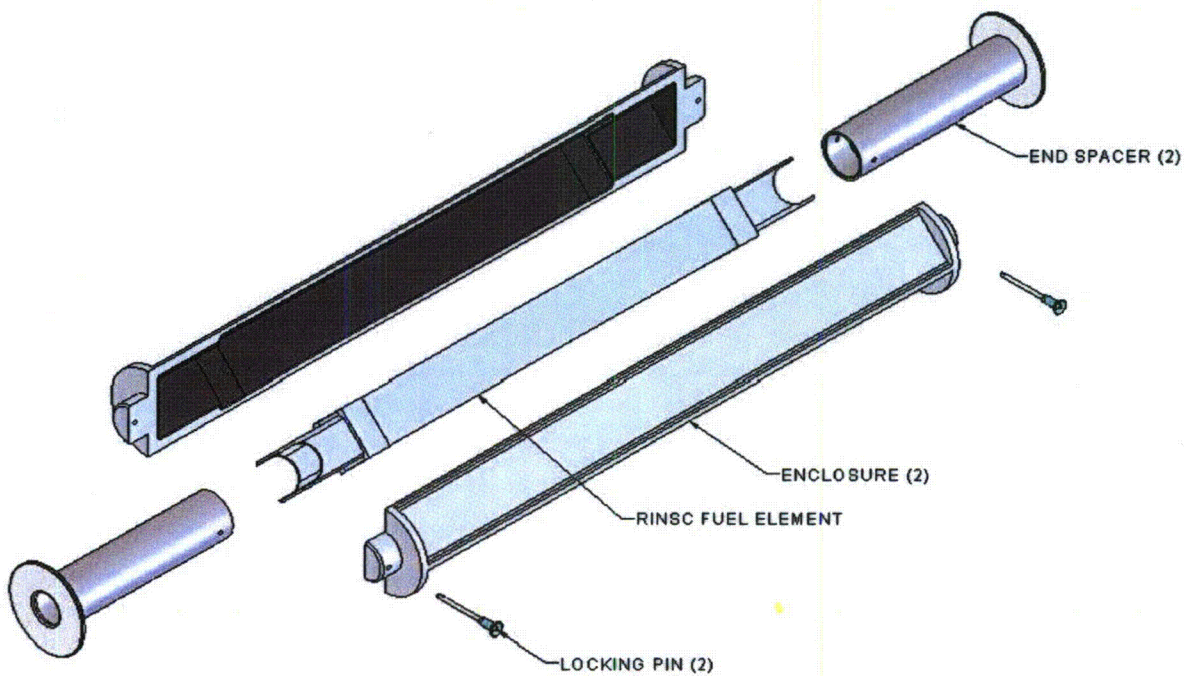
RINSC Fuel Handling Enclosure
